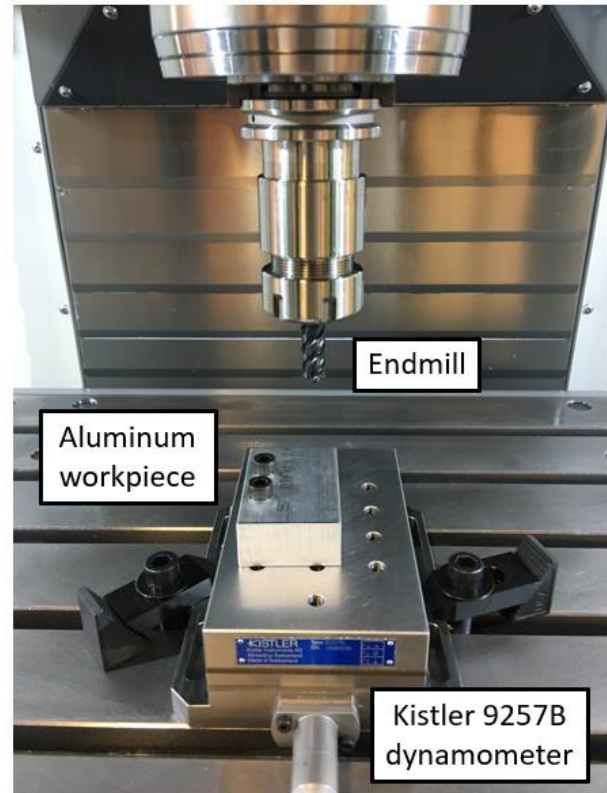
Experimental setup for Iscar endmill cutting force measurement.
